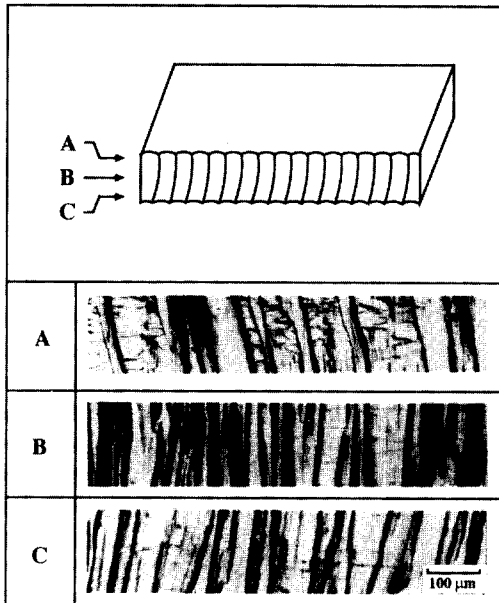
Magnified photograph of a laser cut surface. (Steel D)
